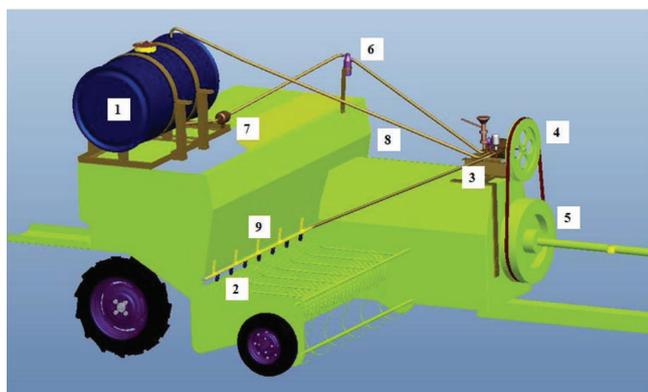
CAD view of the developed mechanized urea spraying system. (1) Urea solution tank; (2) flat fan nozzles; (3) HTP pump assembly; (4) belt and pulley; (5) fly wheel; (6) strainer; (7) cut-off valve; (8) pipe; (9) boom arm.
